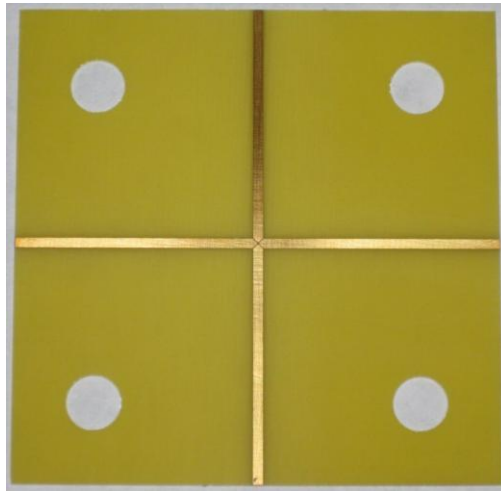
Mating Side Printed Circuit Board for Axial Testing
